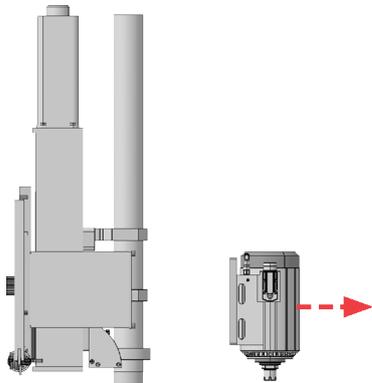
PULLING AWAY THE SPINDLE (VIEW FROM THE SIDE)
